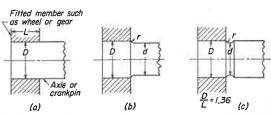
Correct shaping of fitted parts. (a) Conventional method; bending fatigue resistance, 100%. (b) and (c) Improved methods; bending fatigue resistance, about 130%. Fillet and groove r to be surface rolled except when r in (b) can be large (about 0.4 D). If the portion of the shaft in (a), (b) and (c) over which outer part is fitted is surface rolled, then fatigue resistance is more than 200%. (The above data are based on breaking-off strength of full-size fatigue tests in rotating bending of  $\frac{1}{2}$ ing of sharts 7 to 9 11. in diam and made of 0.50% C steel normalized
